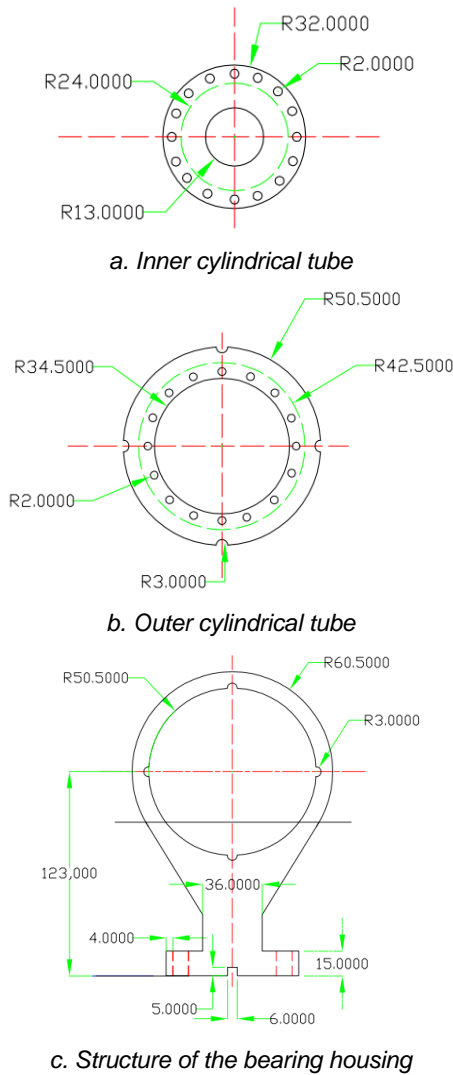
Schematic design of the vibration damper (dimensions in mm)
